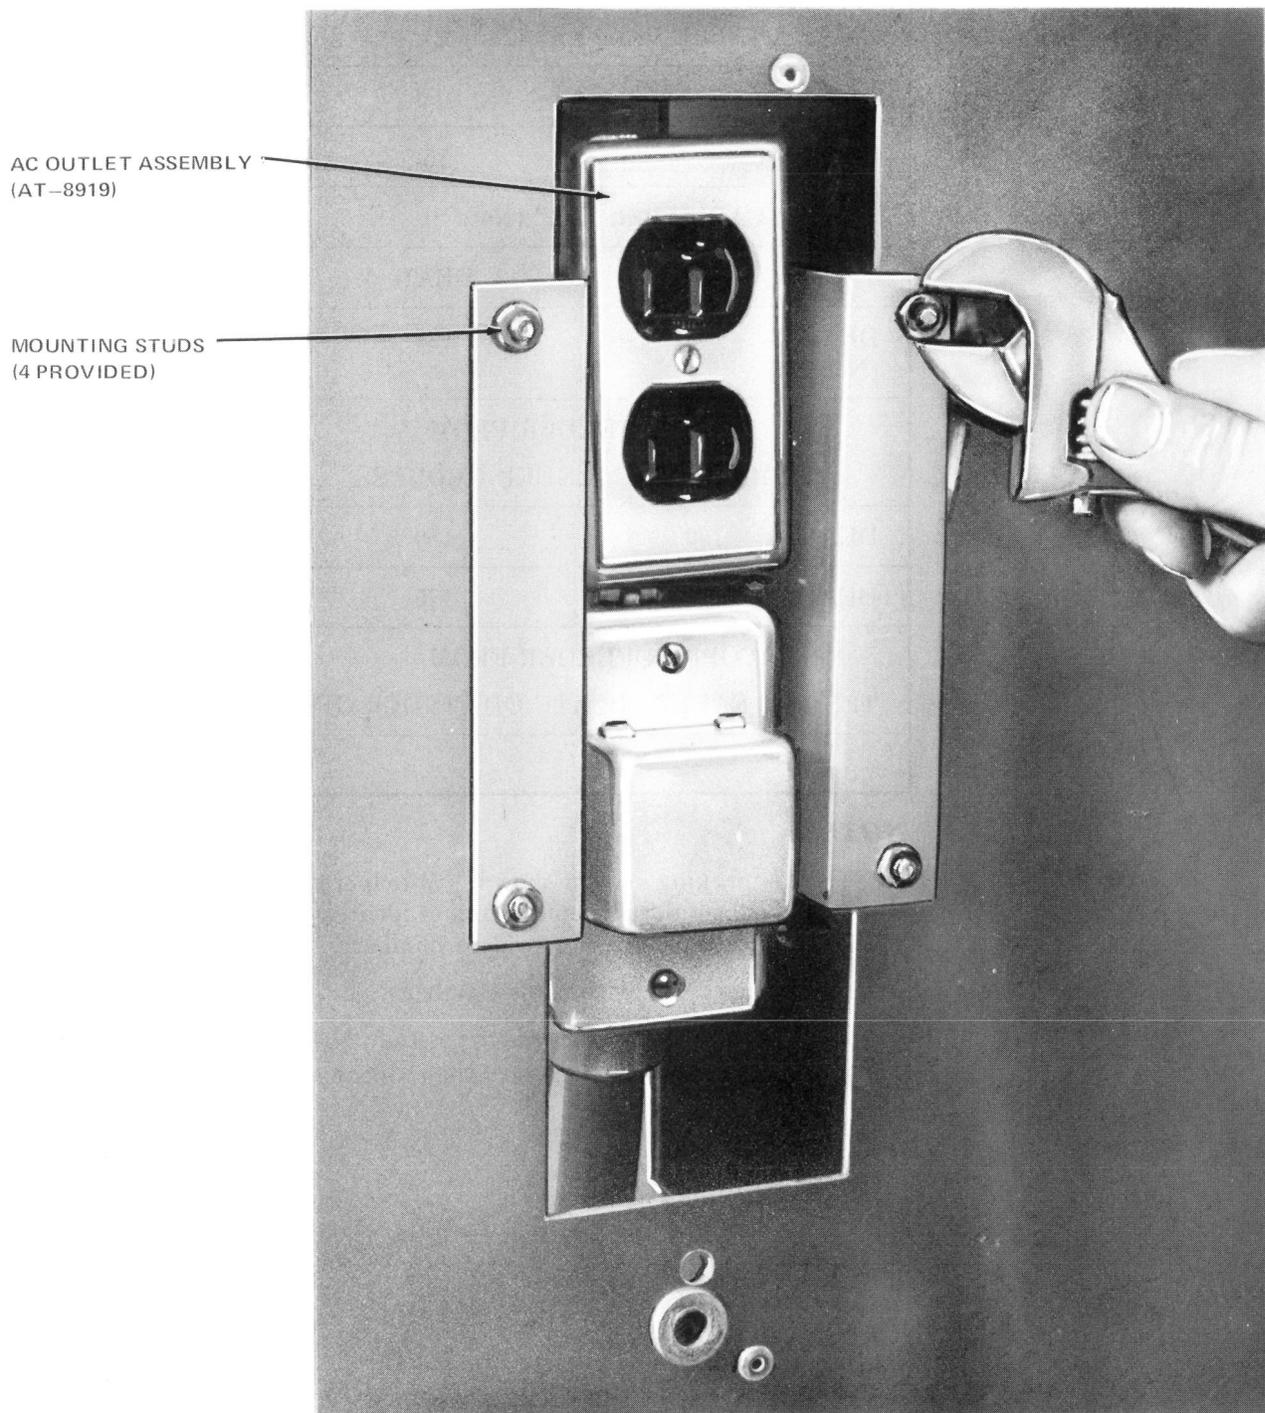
Installing AC Outlet Assembly (AT-8919)
